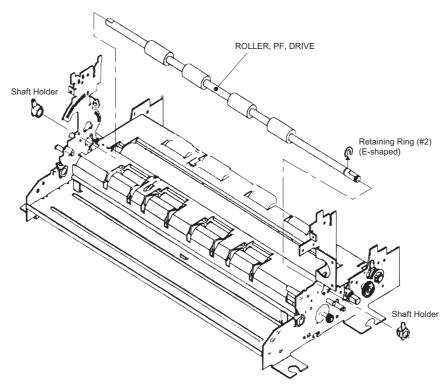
PAPER GUIDE ASSY. Removal (4)
